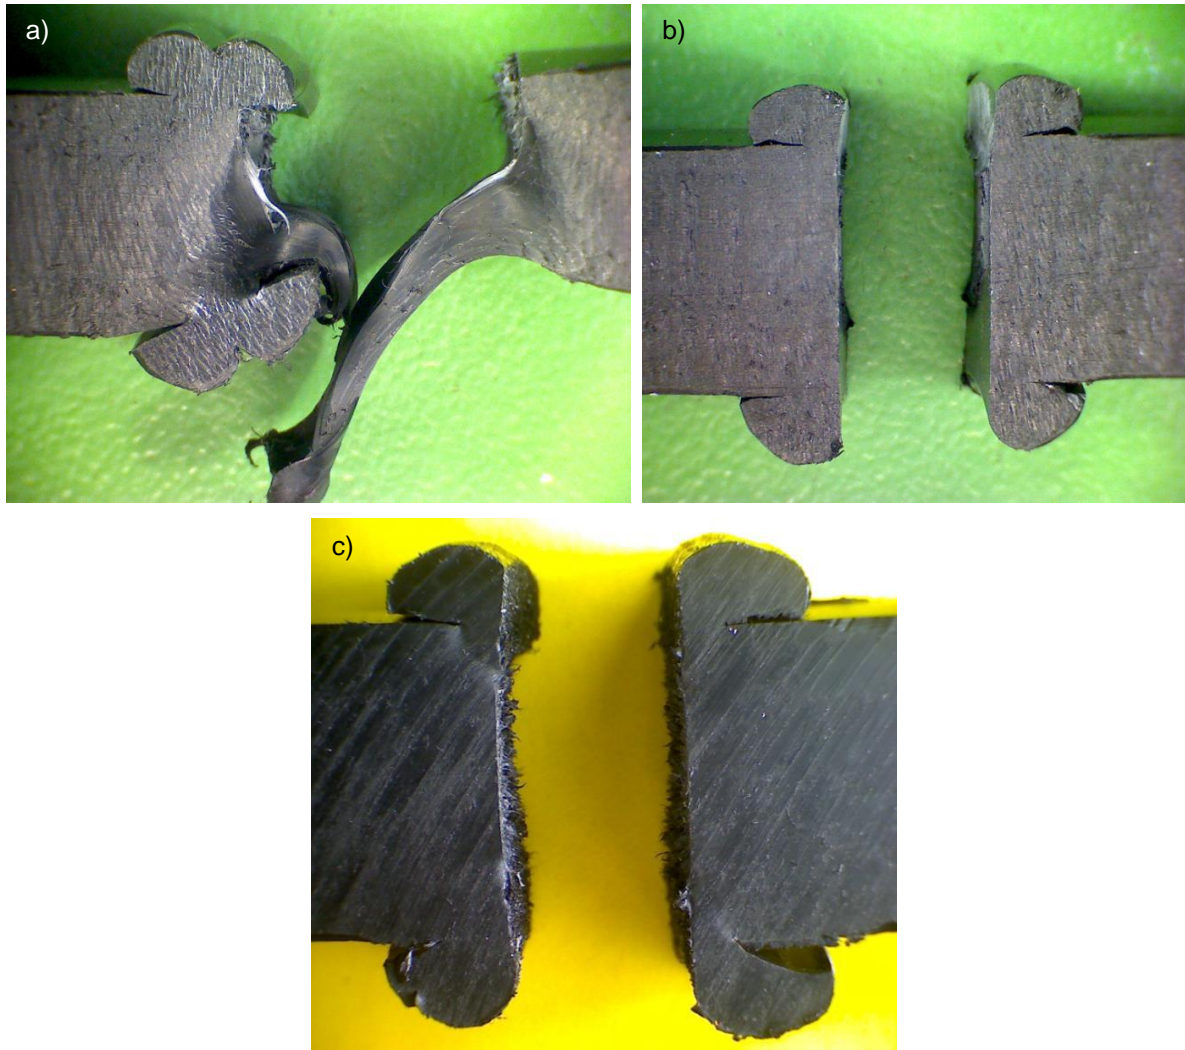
Fracture surfaces of tensile creep rupture specimens from butt fusion welds in 225mm pipe containing: a) no flaws; b) light talc contamination; and c) medium sand contamination.
